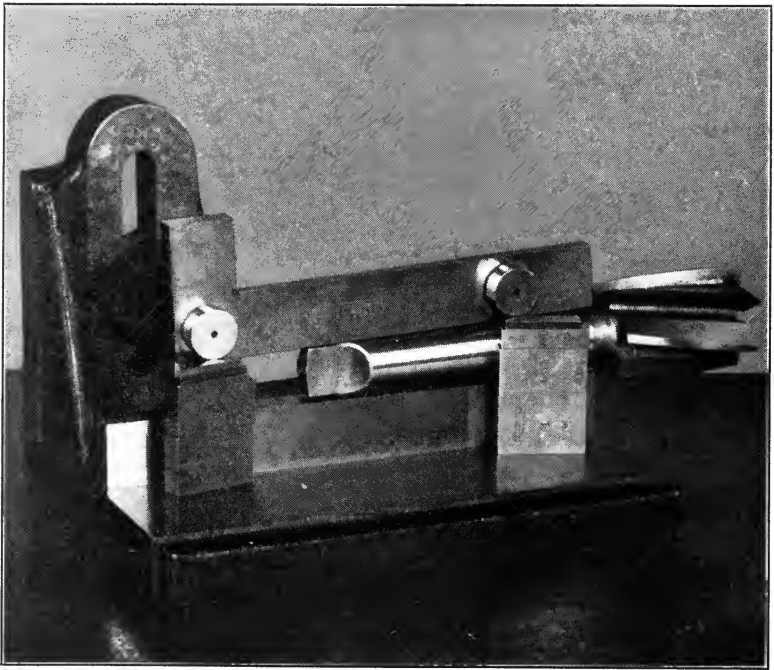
Use of Johansson Gage Blocks and Sine Bar to Check Taper of a Milling Cutter Shank
